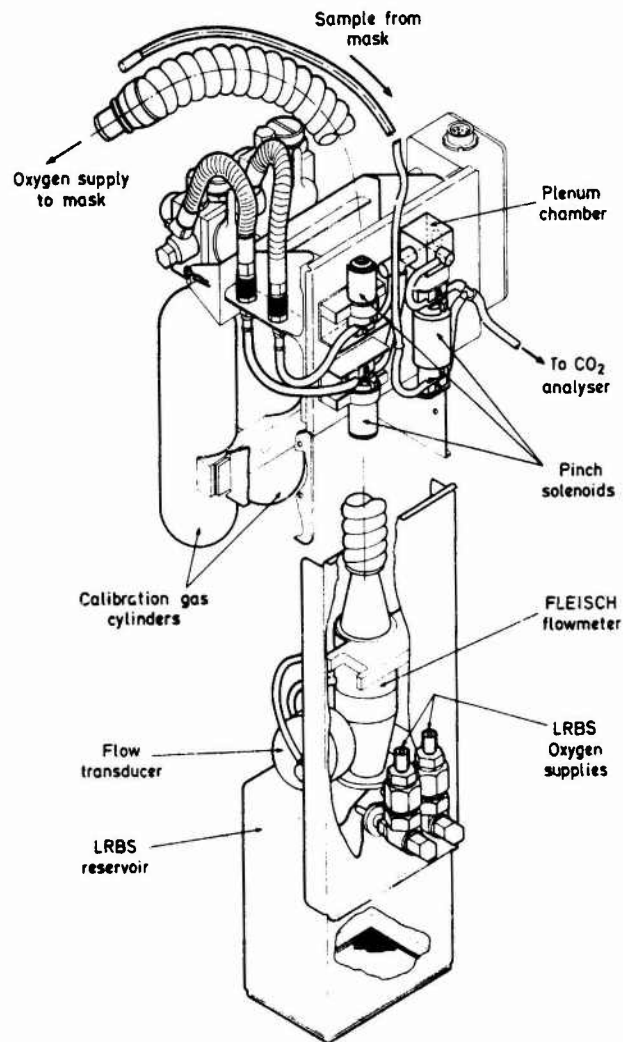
Exploded view of the in-flight carbon dioxide calibration unit mounted on the LRBS 'whoe'
